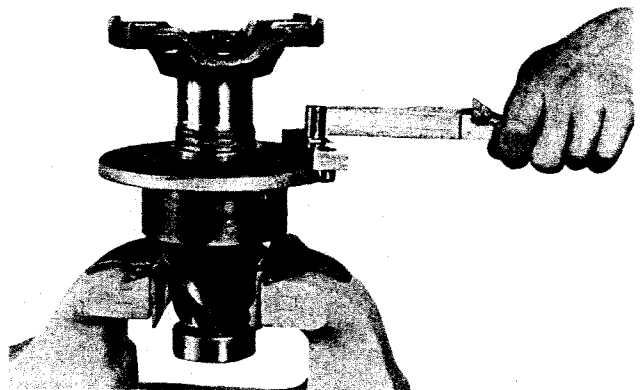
Checking Drive Pinion Bearing Preload with Torque Wrench (pinion in vise).
